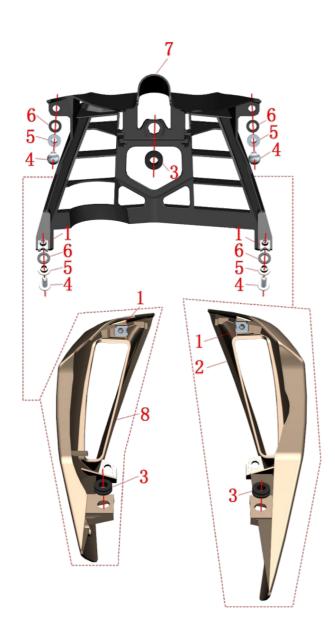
L	OWER WIND	Lower air guide sleeve component-2	CHK	40)
